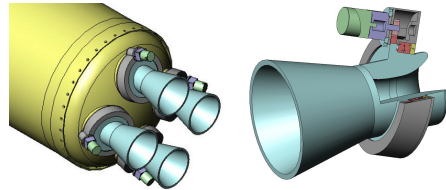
Rocket engine with 4 movable nozzles; Canted rotatable nozzle (single unit)
